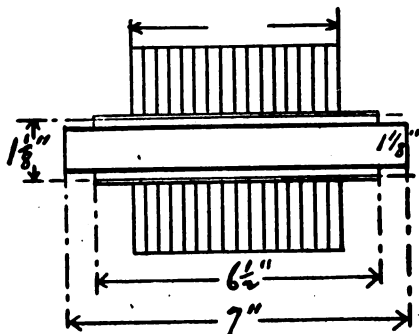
Sectional View with Dimensions of Parts for Spark Coil.
